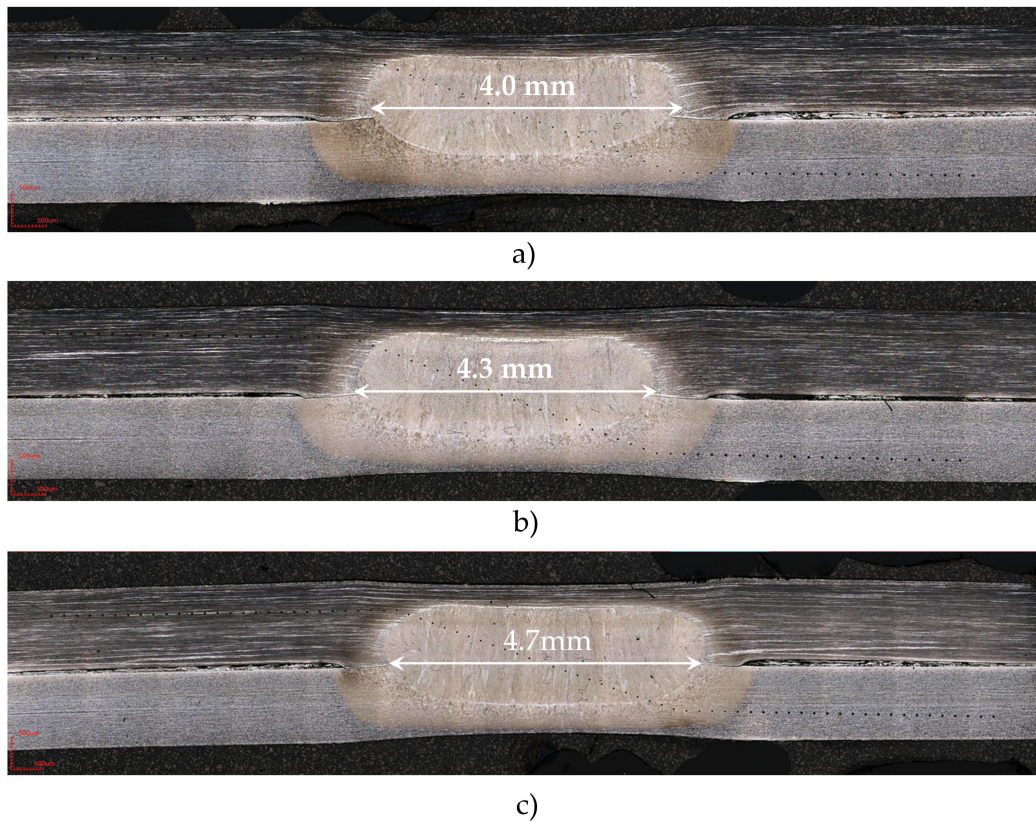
Spot weld metallographic cross sections of Duplex 4Al/DP600 spot welds at the three positions in the welding range (Duplex 4Al is always the upper sheet): a) lower end, b) middle position, c) upper end.
